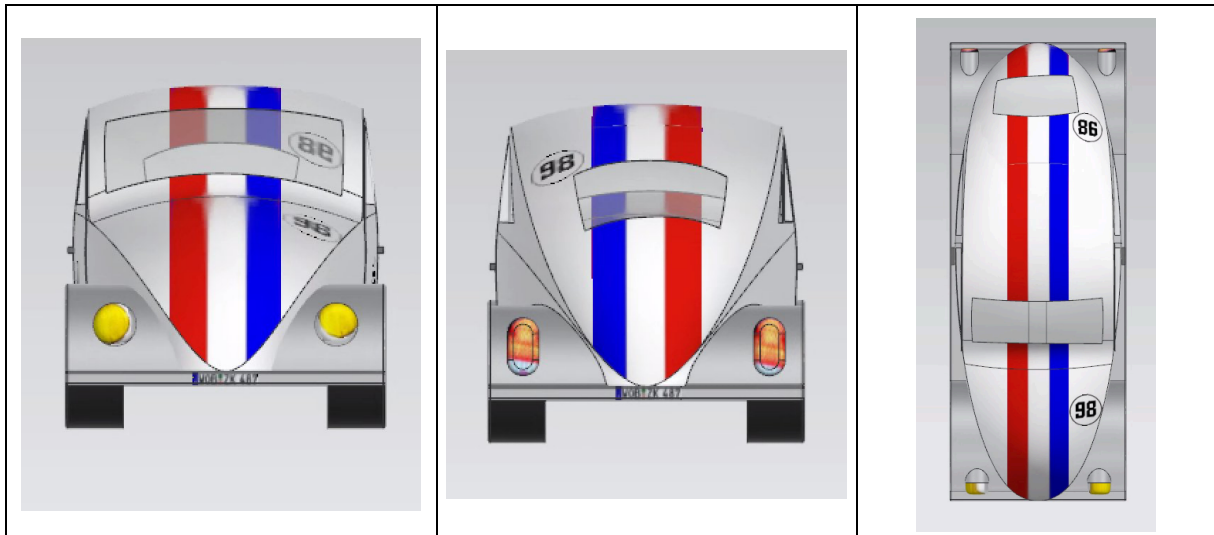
Front view (left) with headlights, bumper, and converging stripes. Rear view (right) with taillights, license plate, and rear spoiler lip. Top-down plan view showing the full red, white, and blue stripe layout, fender profiles, and number placement.
